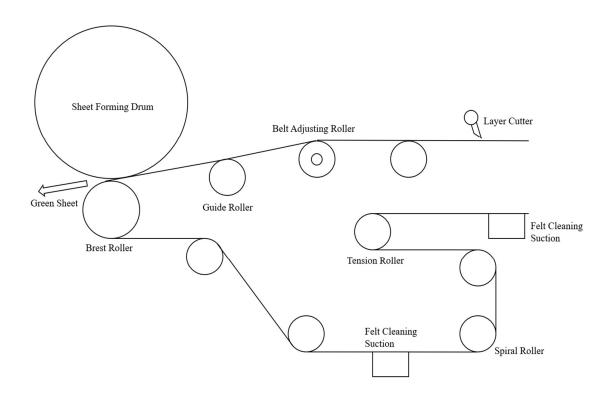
Illustration of Sheet Forming and Various Rollers
